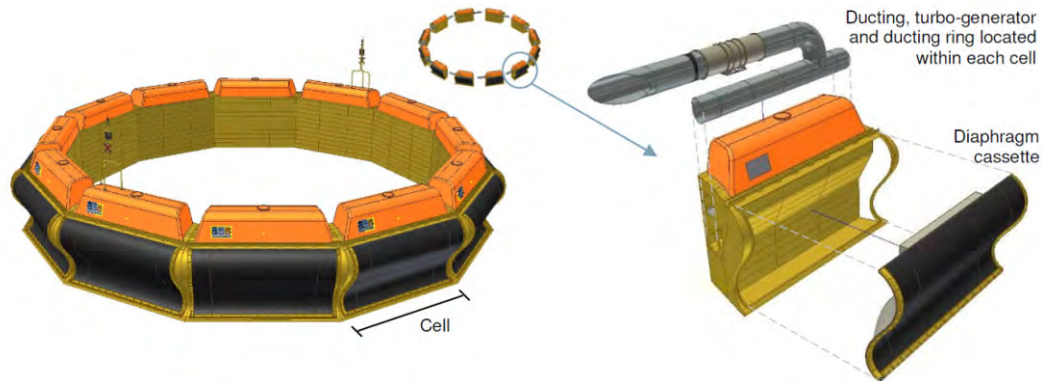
General 3D Arrangement of Device and Exploded View of a Cell
